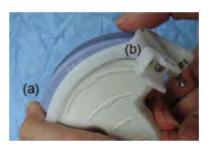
Probe/Multi-angle Bracket Alignment 2
